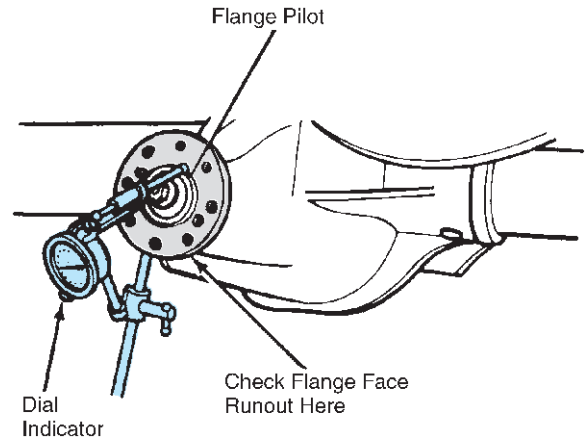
Runout of the companion flange is measured with a dial indicator, as shown here. (Courtesy of Ford Motor Company)
